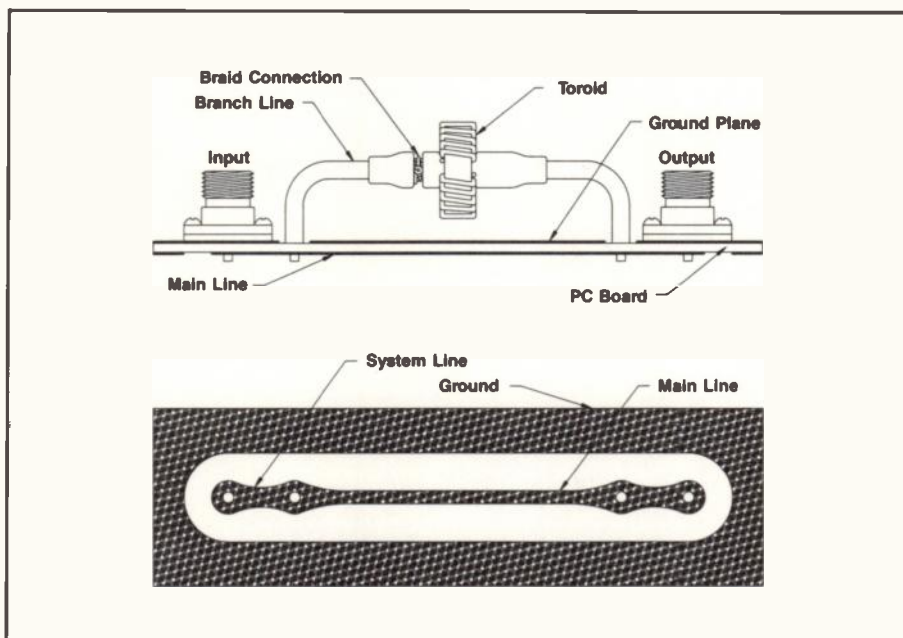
Prototype divided line/toroidal coupler: side view (a) and bottom view (b).
